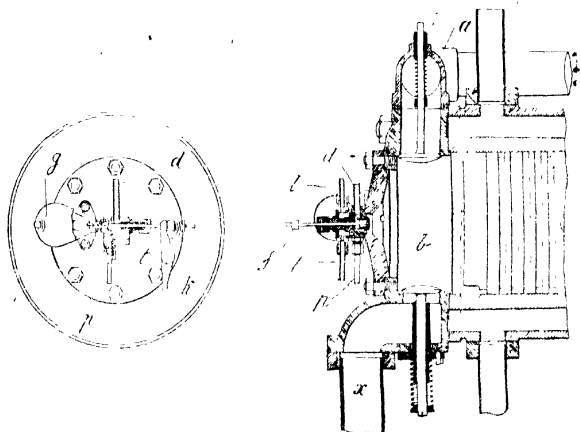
End and side sectional views, showing details of duplex air-injection atomiser of Blackstone oil engine.
